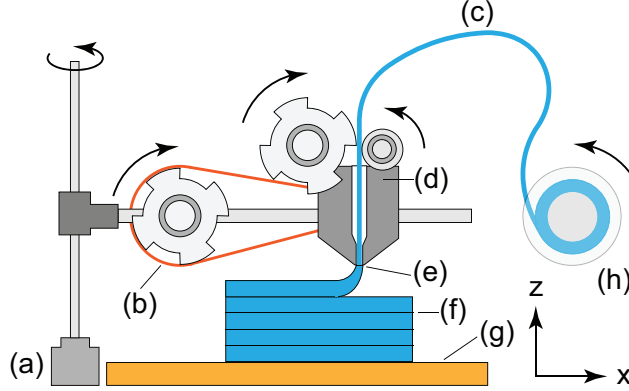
Schematic illustration of a material extrusion 3D printer with (a) z-axis motor and screw drive, (b) x-axis motor and belt drive, (c) feedstock filament, (d) extruder carriage assembly with motor, (e) heated nozzle, (f) printed part, (g) build plate, and (h) filament cartridge.
